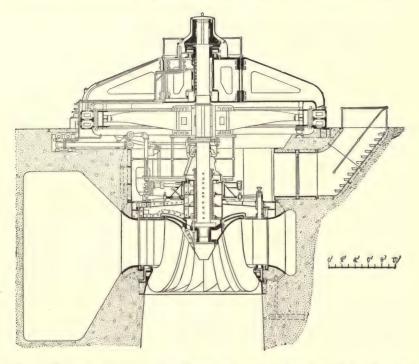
Single-runner Vertical Turbine with Volute Casing and Draft
